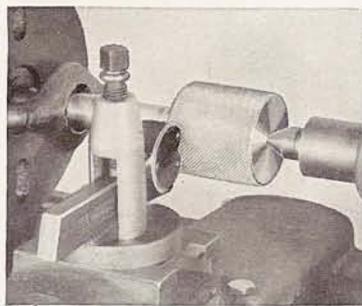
Knurling a Large Handle Mounted Between Centers in the Lathe.
